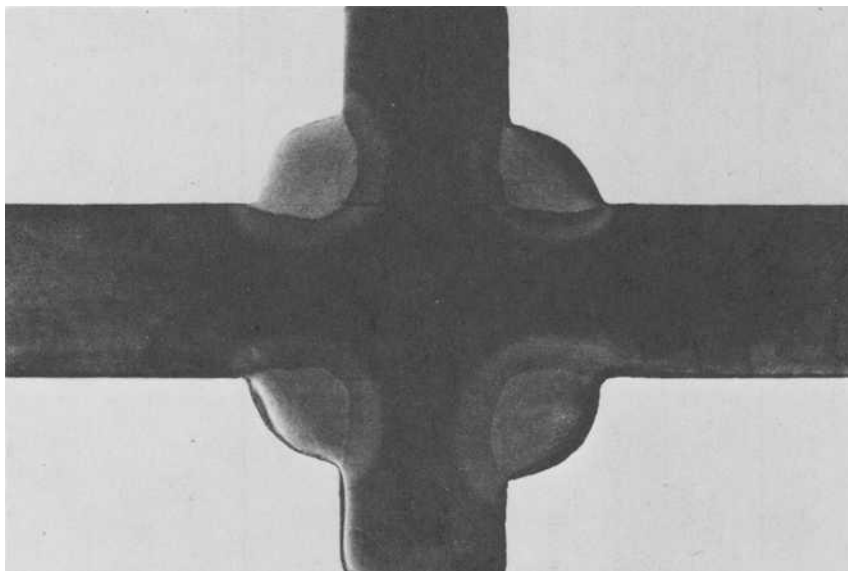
Welded joints—cruciform joints—as-welded.
